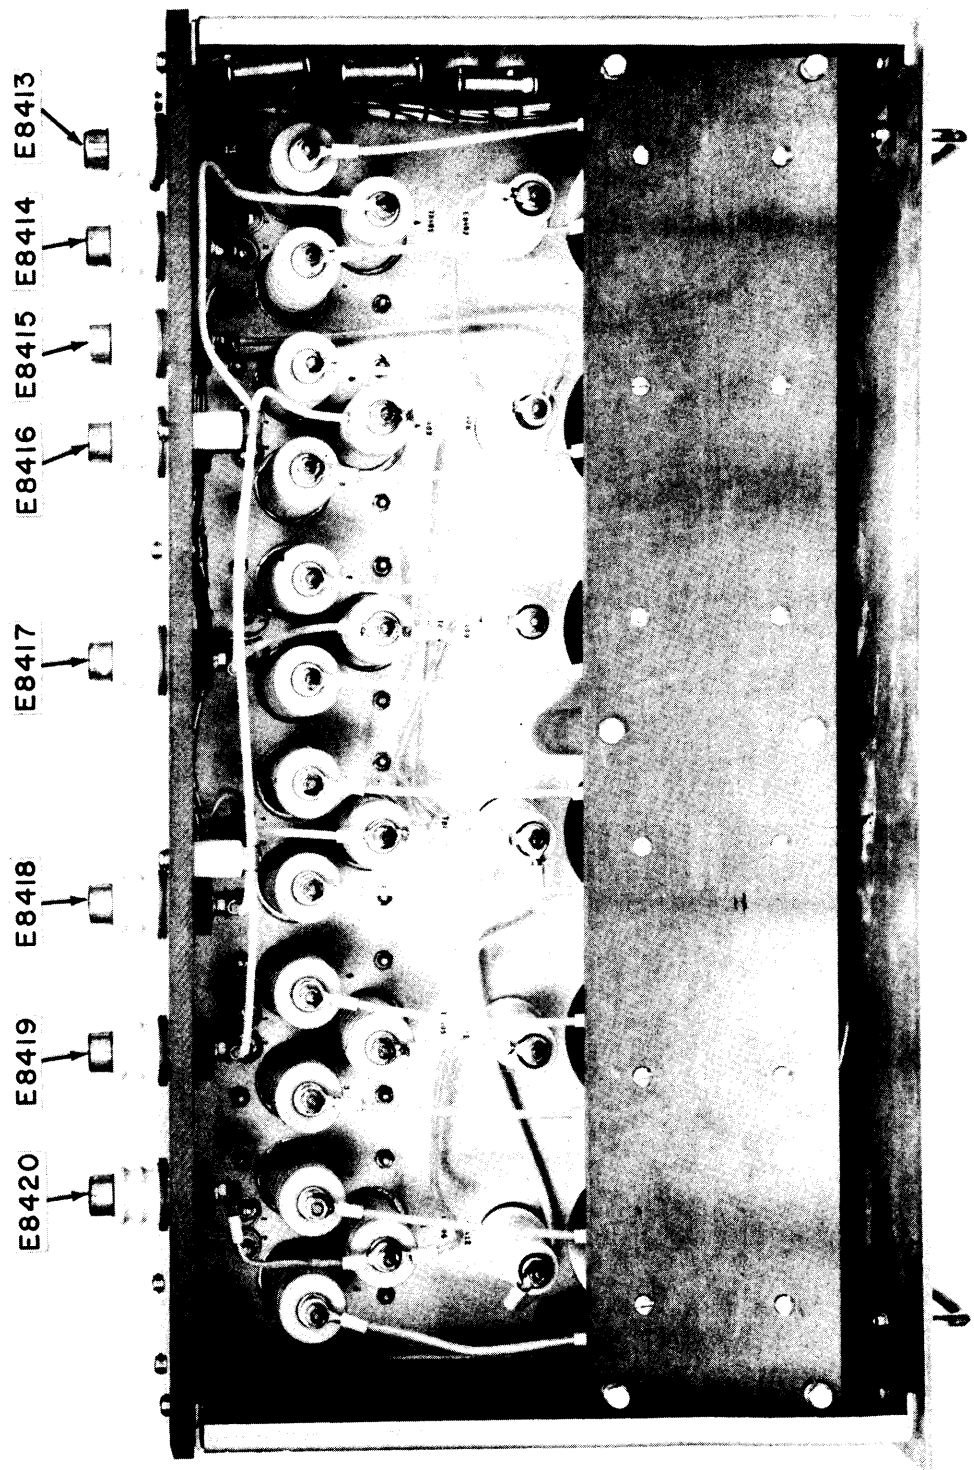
Bottom View with Callouts, High Voltage Rectifier Drawer, GPT-40K
